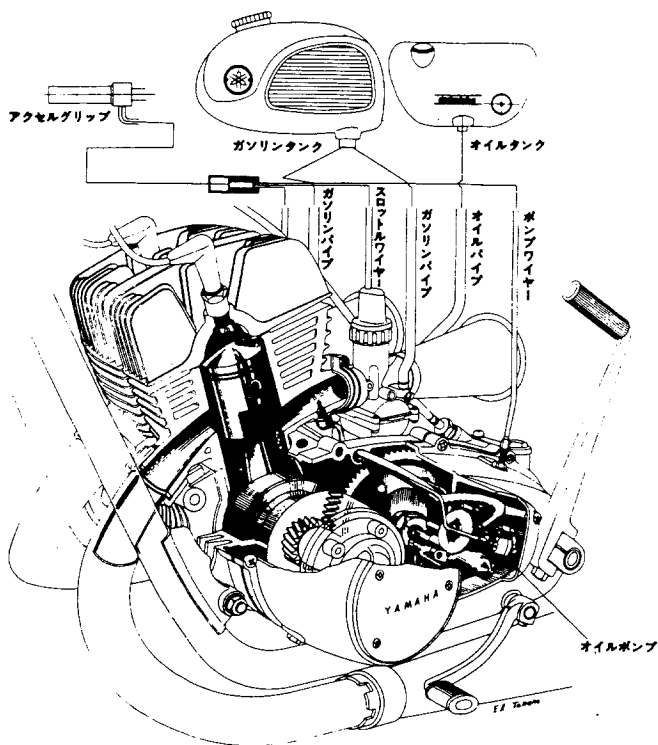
"Autolube" system installed on a twin-cylinder 250 cc engine
